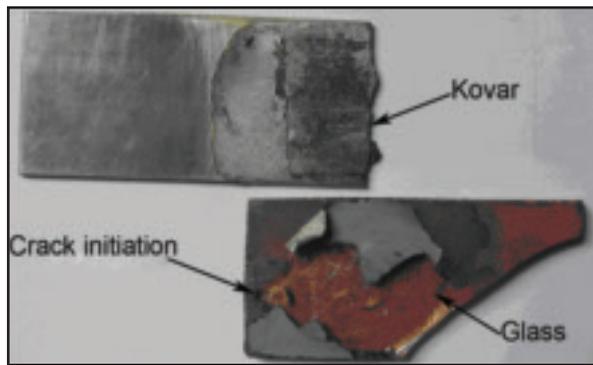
Macromorphology of shear crack on a brazed joint.
